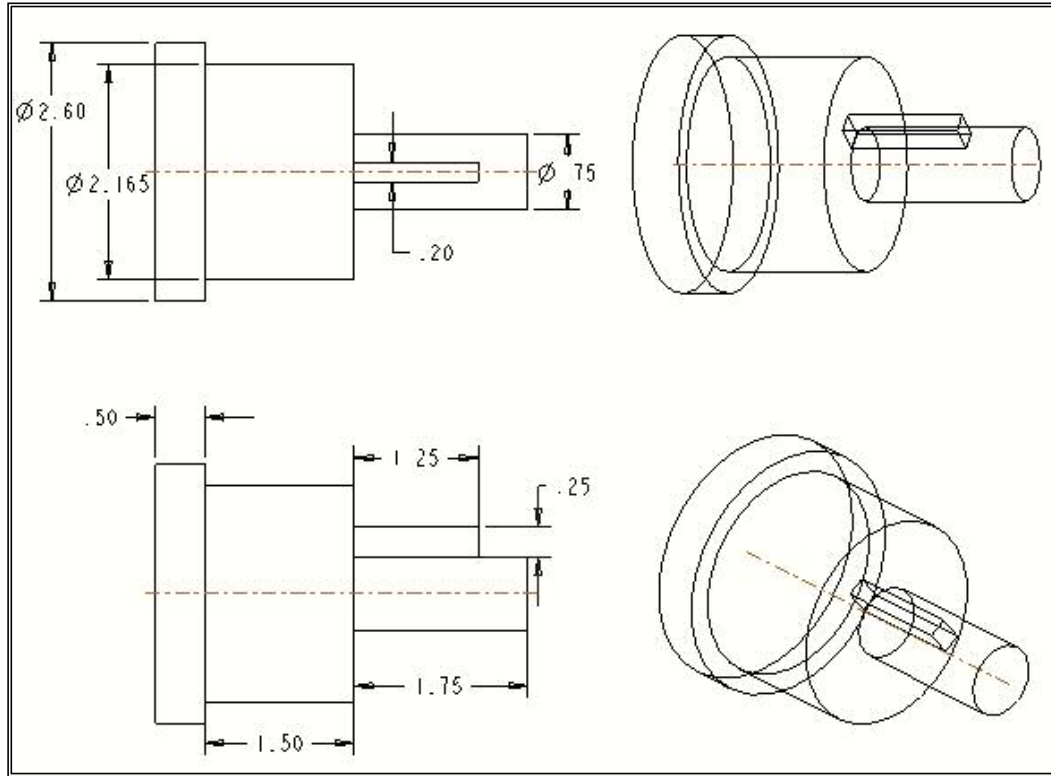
Multiview drawing of spring holder with dimensions
